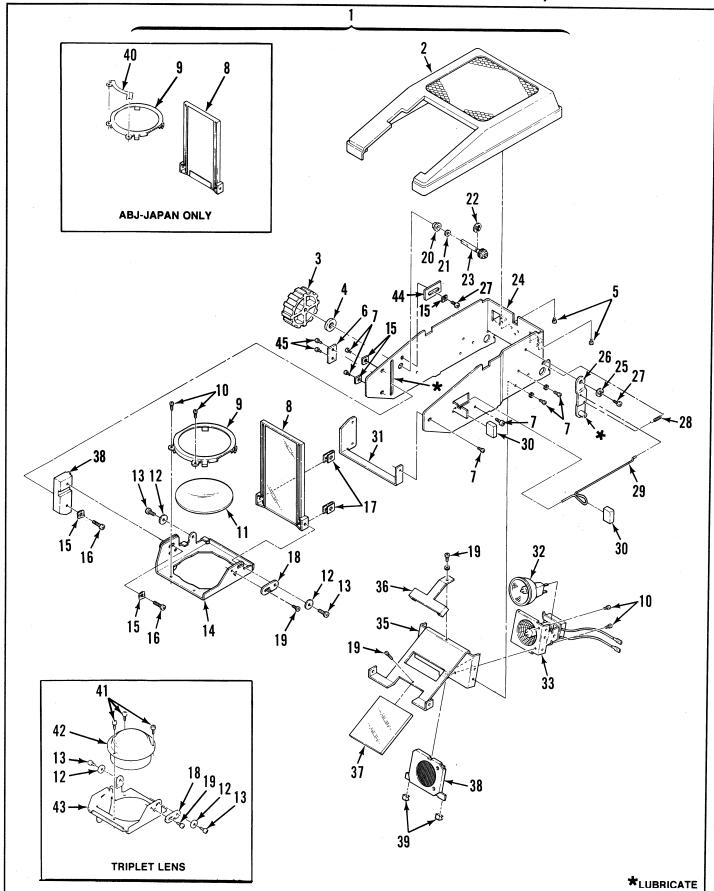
HEAD ASSEMBLY (FOR EVW LAMP MODELS)
